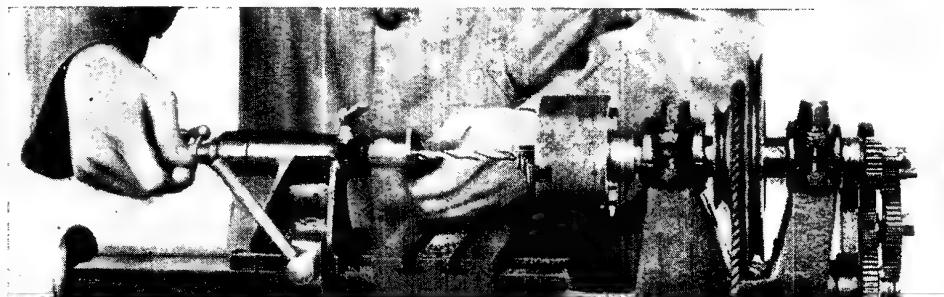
Drilling on the lathe in this case is carried out by holding the drill in the drill chuck attached to the tailstock
